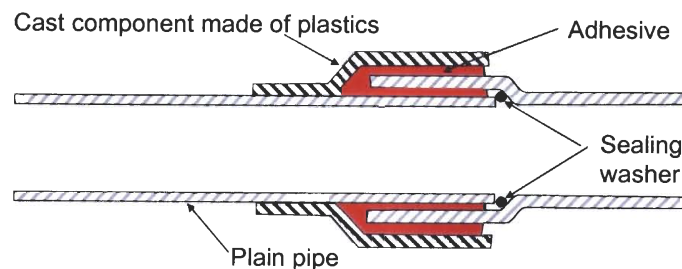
Developed joint design geometry for steel pipes up to 600 mm in diameter.
